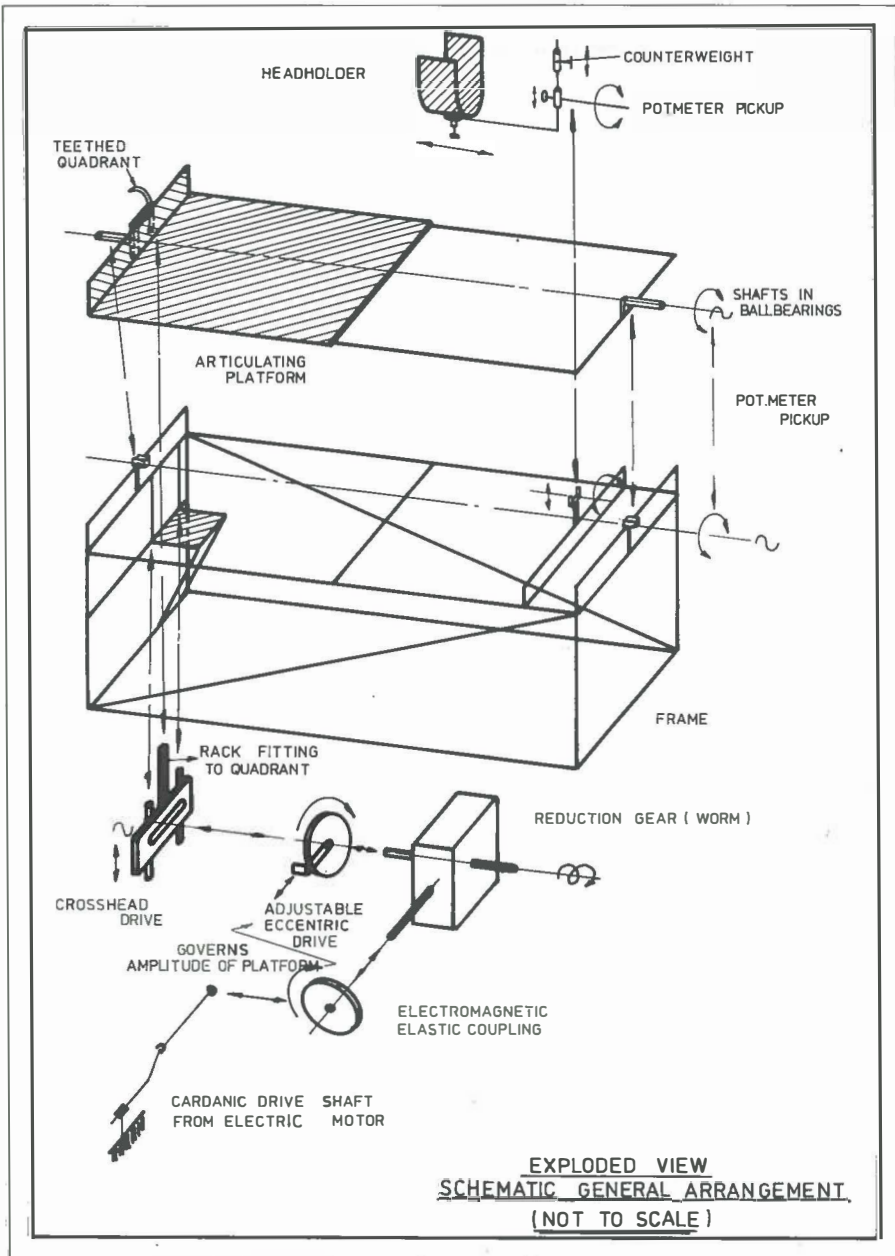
2. Exploded view, schematic general arrangement of the rocking table and of the head-holder.
